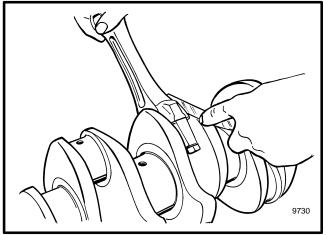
CHECK THE CLEARANCE BETWEEN THE CONNECTING ROD AND THE CRANKSHAFT
